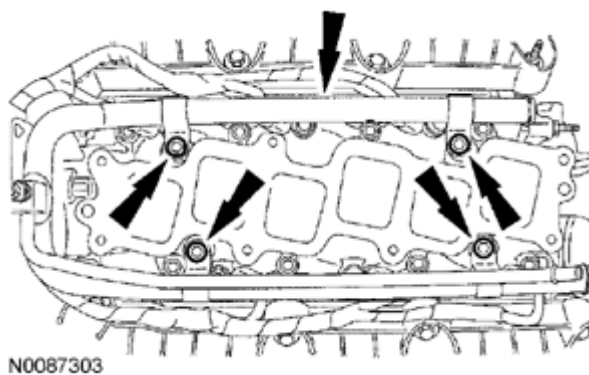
Locating Fuel Rail And Injectors Assembly Bolts
